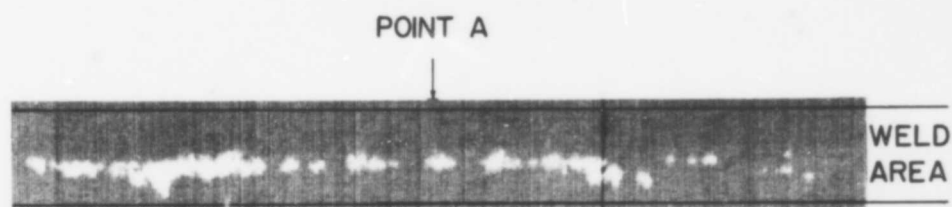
Delta Scans for 1" Butt Welds
